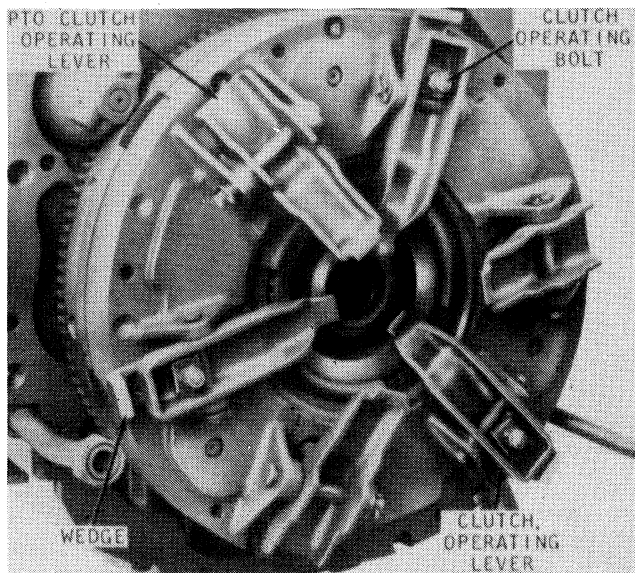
Insert wedges under clutch operating levers as shown to hold clutch pack together during removal and installation. If levers bottom out on the clutch cover, clutch pack is excessively worn and should be repaired.
